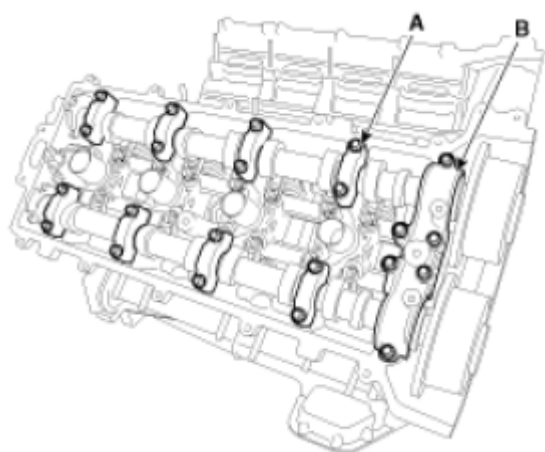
Identifying Camshaft Bearing Caps And Camshaft Thrust Bearing Cap (RH)
